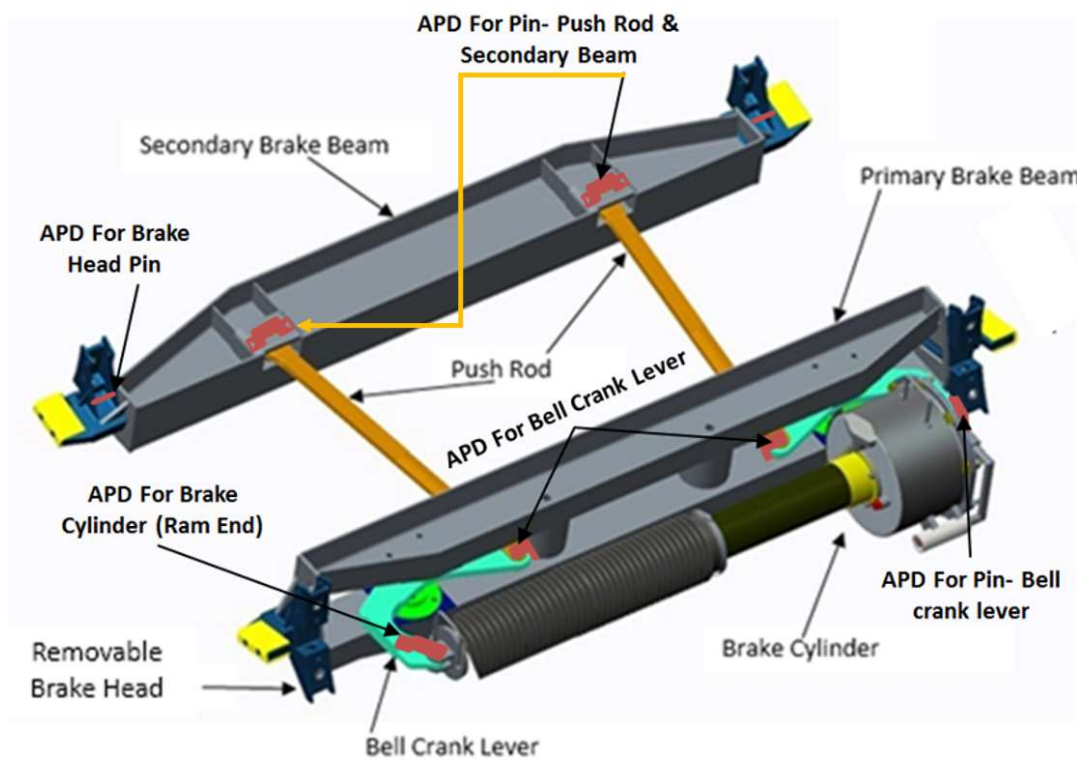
General Arrangement of Bogie Mounted Brake System (BMBS)
